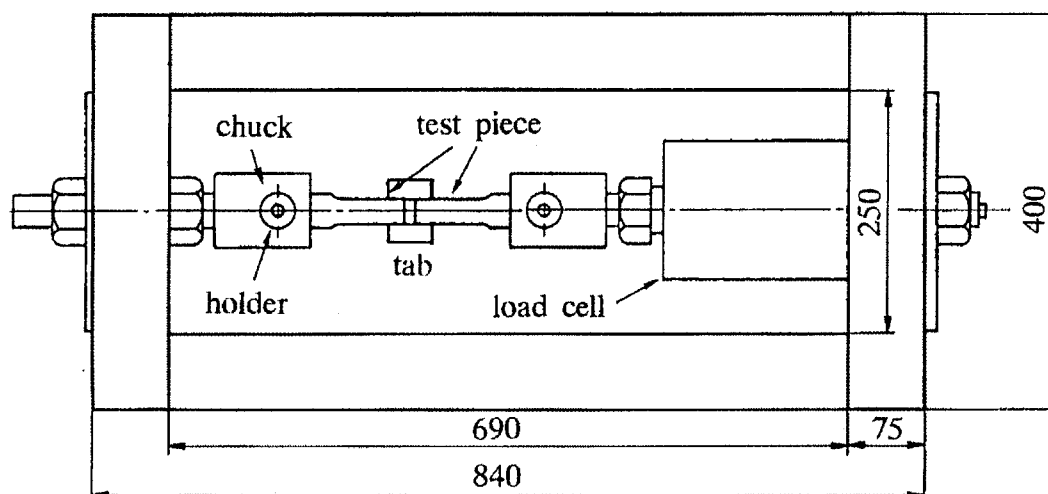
Setup of specimens for weld cracking test using trial filler metal with preheating
